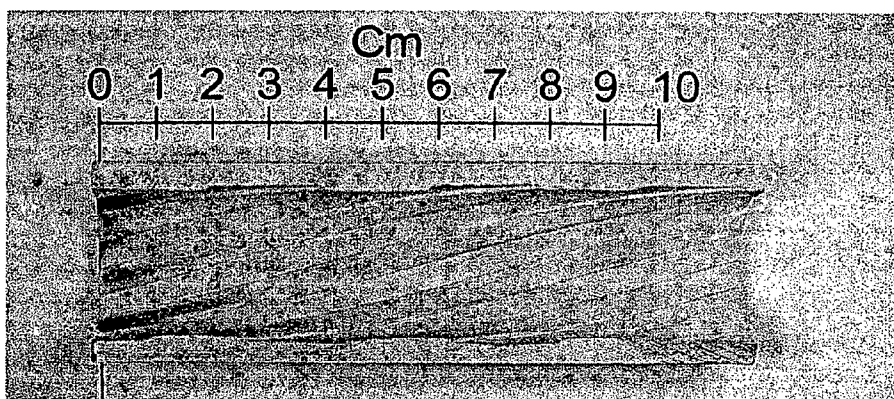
A view of a sintered Si₃N₄ rifling tube that had been sectioned in half in the as-molded state.
